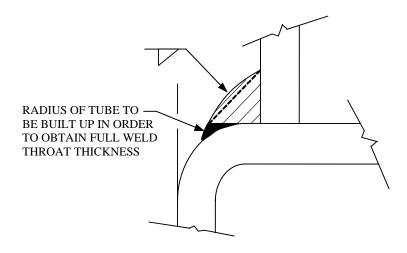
BUILD UP RADIUS WELD
